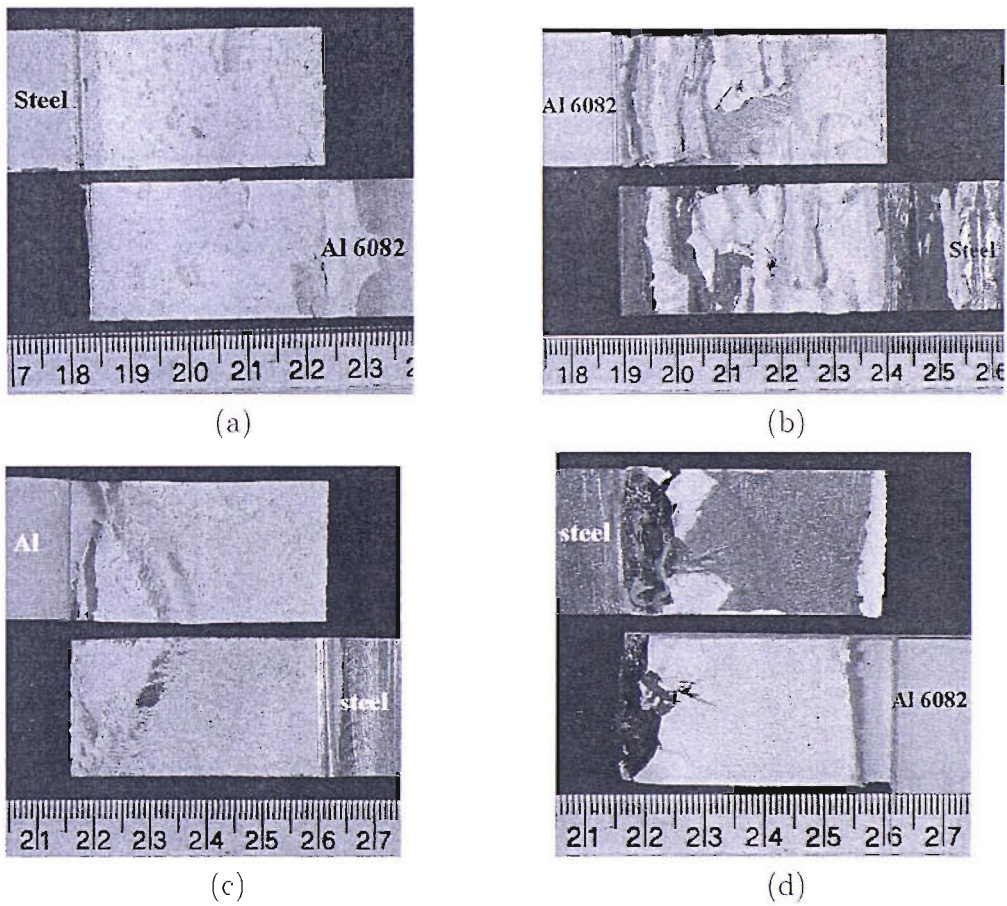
Adhesive failure mode of unaged butt strap joints: (a) 1 mm, (b) 3 mm, (c) 5 mm, (d) 10 mm adhesive thickness
